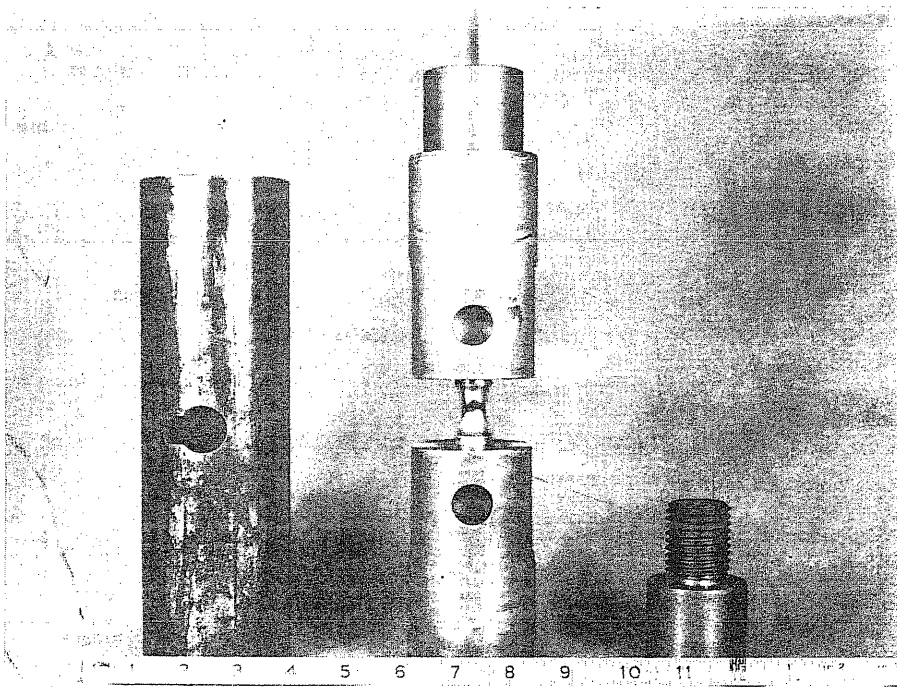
LOADING-HEAD AND SLEEVE ASSEMBLY
